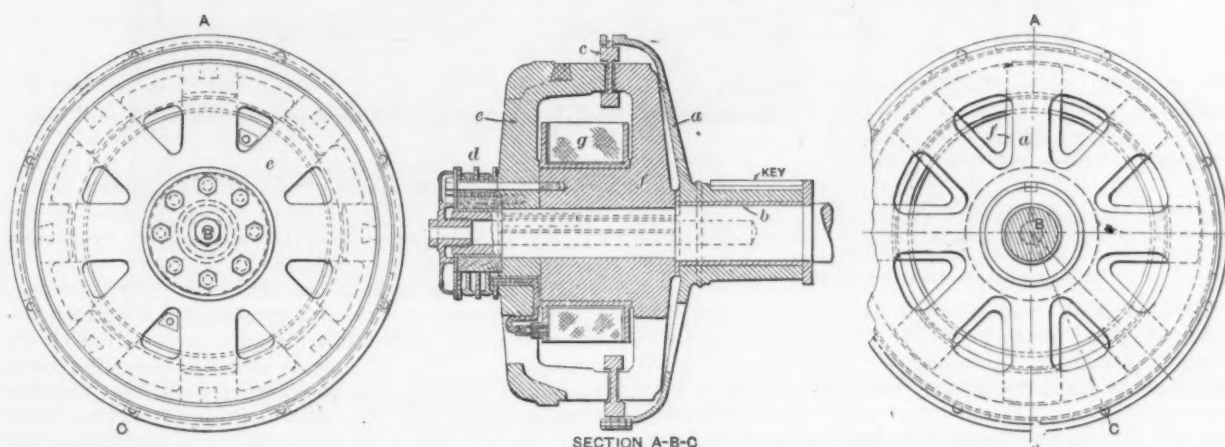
Details of the Electric Induction Clutch for Driving Reversing Machinery, Made by the Wheeling Mold & Foundry Company, Wheeling, W. Va.
